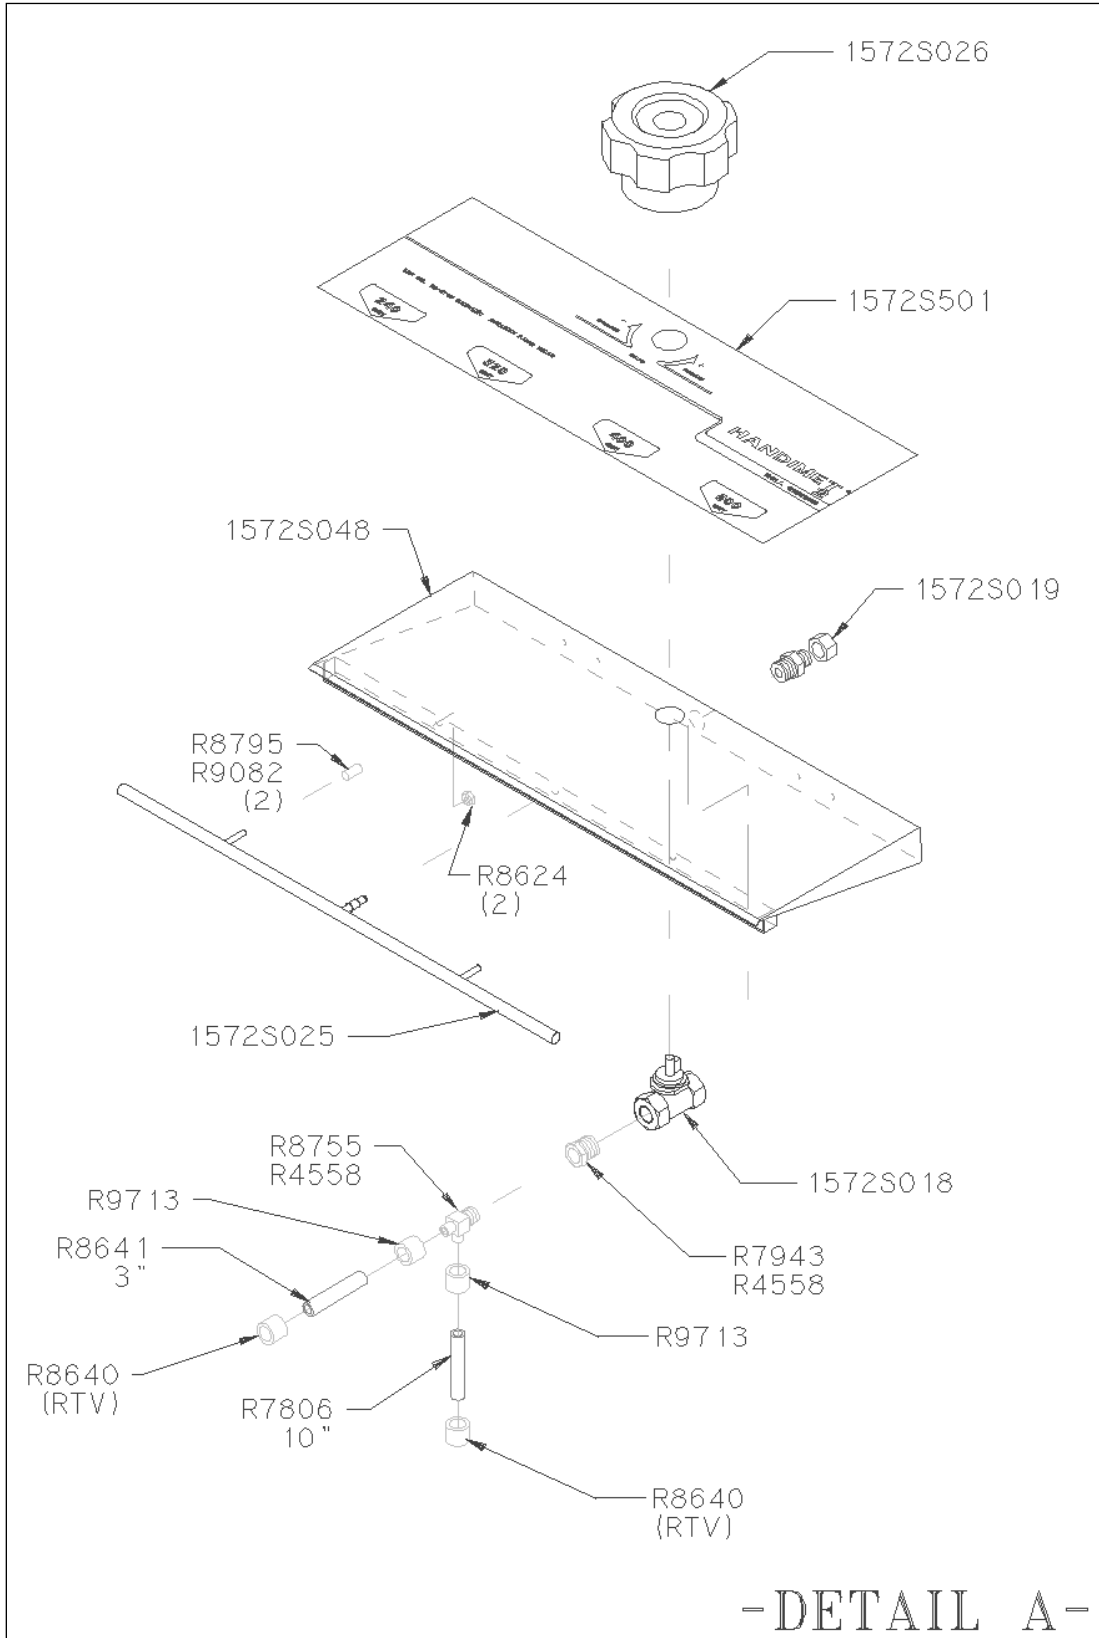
HandiMet 2 Assembly Diagram, Detail A (391572A)
